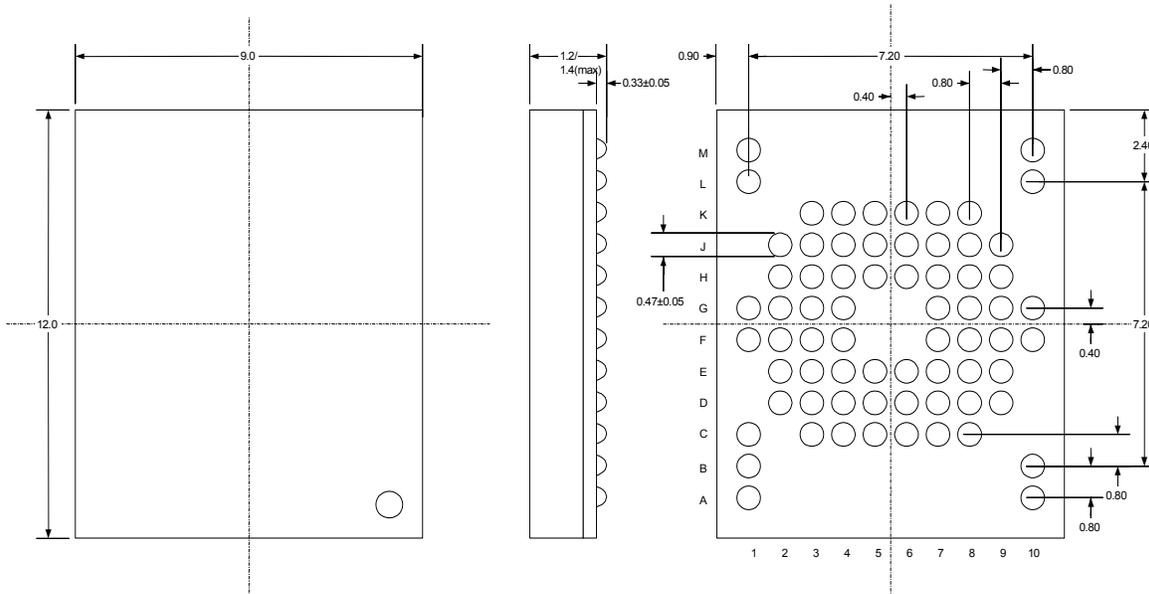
Mechanical Dimensions 9x12 FBGA Package
